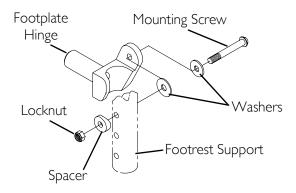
Installing Adjustable Angle Flip-Up Footplate Hinge
